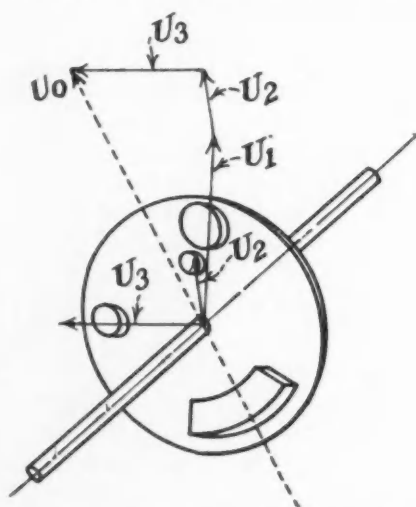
Several Machine Parts Bolted Together into One Unbalanced Assembly
